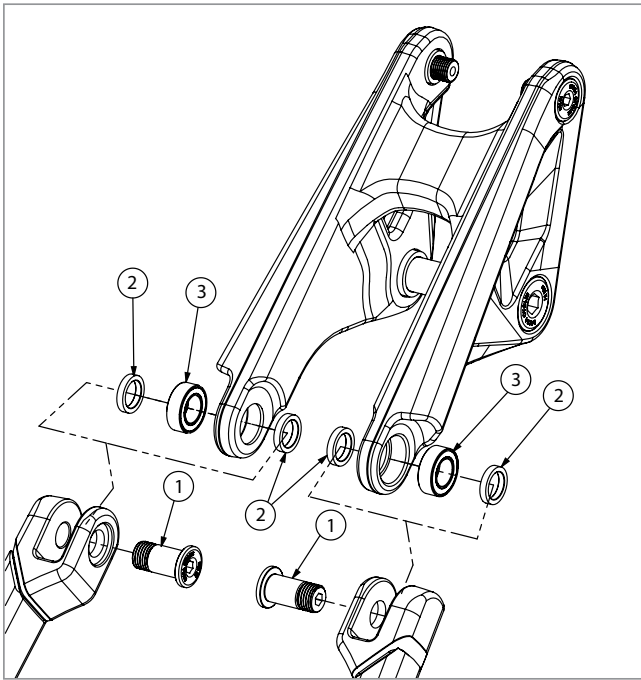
Notch 1, Notch 2 Link Bolt Detail View
